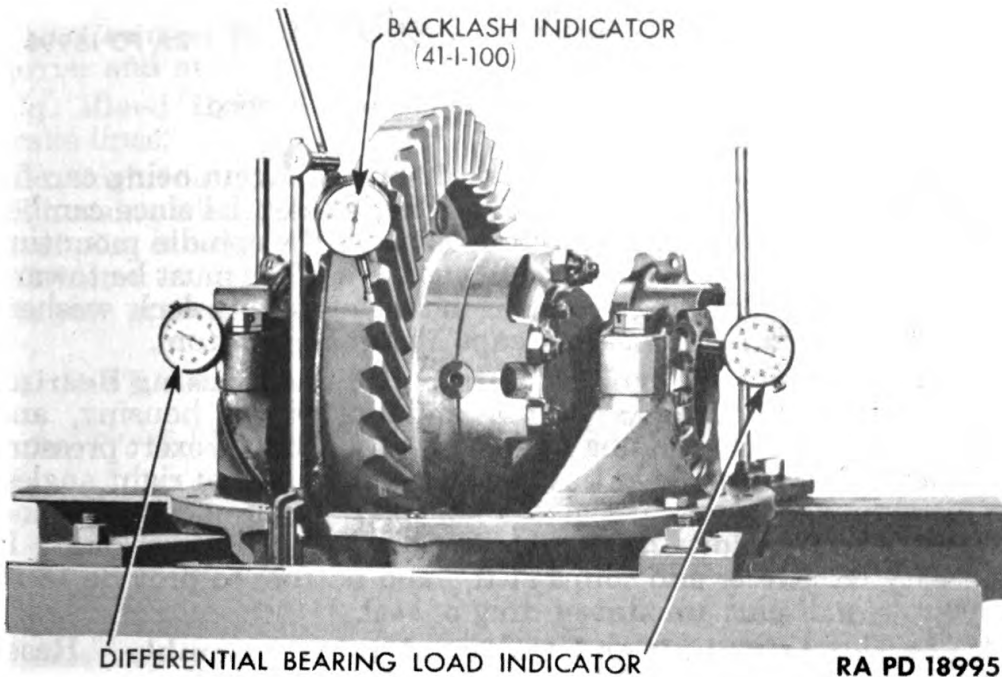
Differential Bearing and Gear Backlash Adjustment
